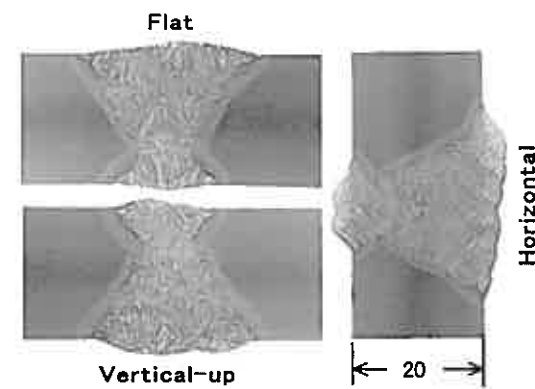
Macrostructure of DW-55LSR weld metal made in flat, horizontal and vertical-up welding
